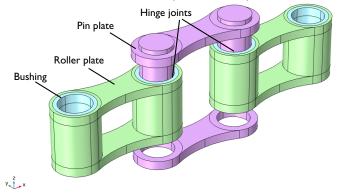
Exploded view of the chain link connection. The connection between links is formed by inserting the pin plates into the hollow roller plate cylinders.
